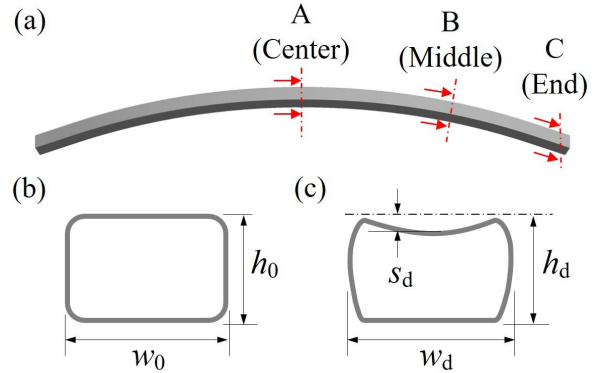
Measuring local deformations: (a) measurement points; (b) initial shape; (c) shape after forming
